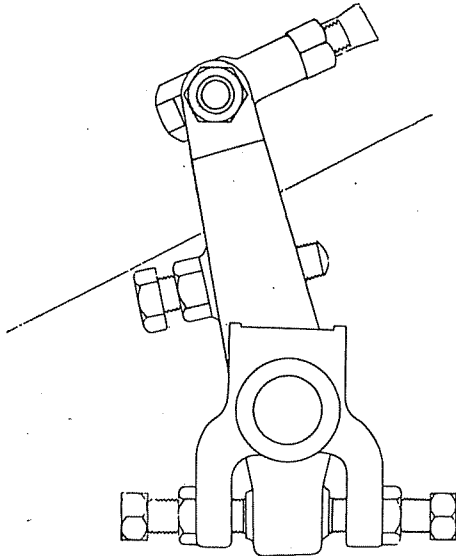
Clutch Pedal Adjusting Mechanism.
